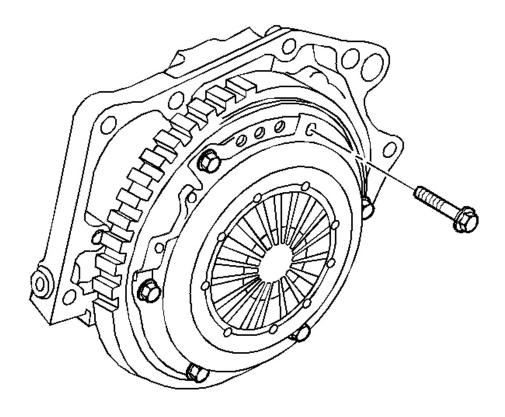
View Of Clutch Cover Bolt Courtesy of GENERAL MOTORS CORP.
